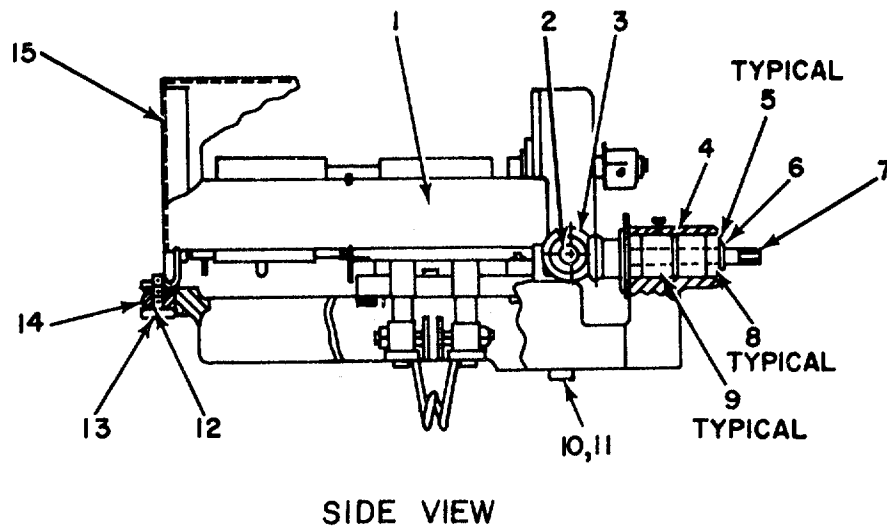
Capacitor Assembly (Sheet 1 of 2).
